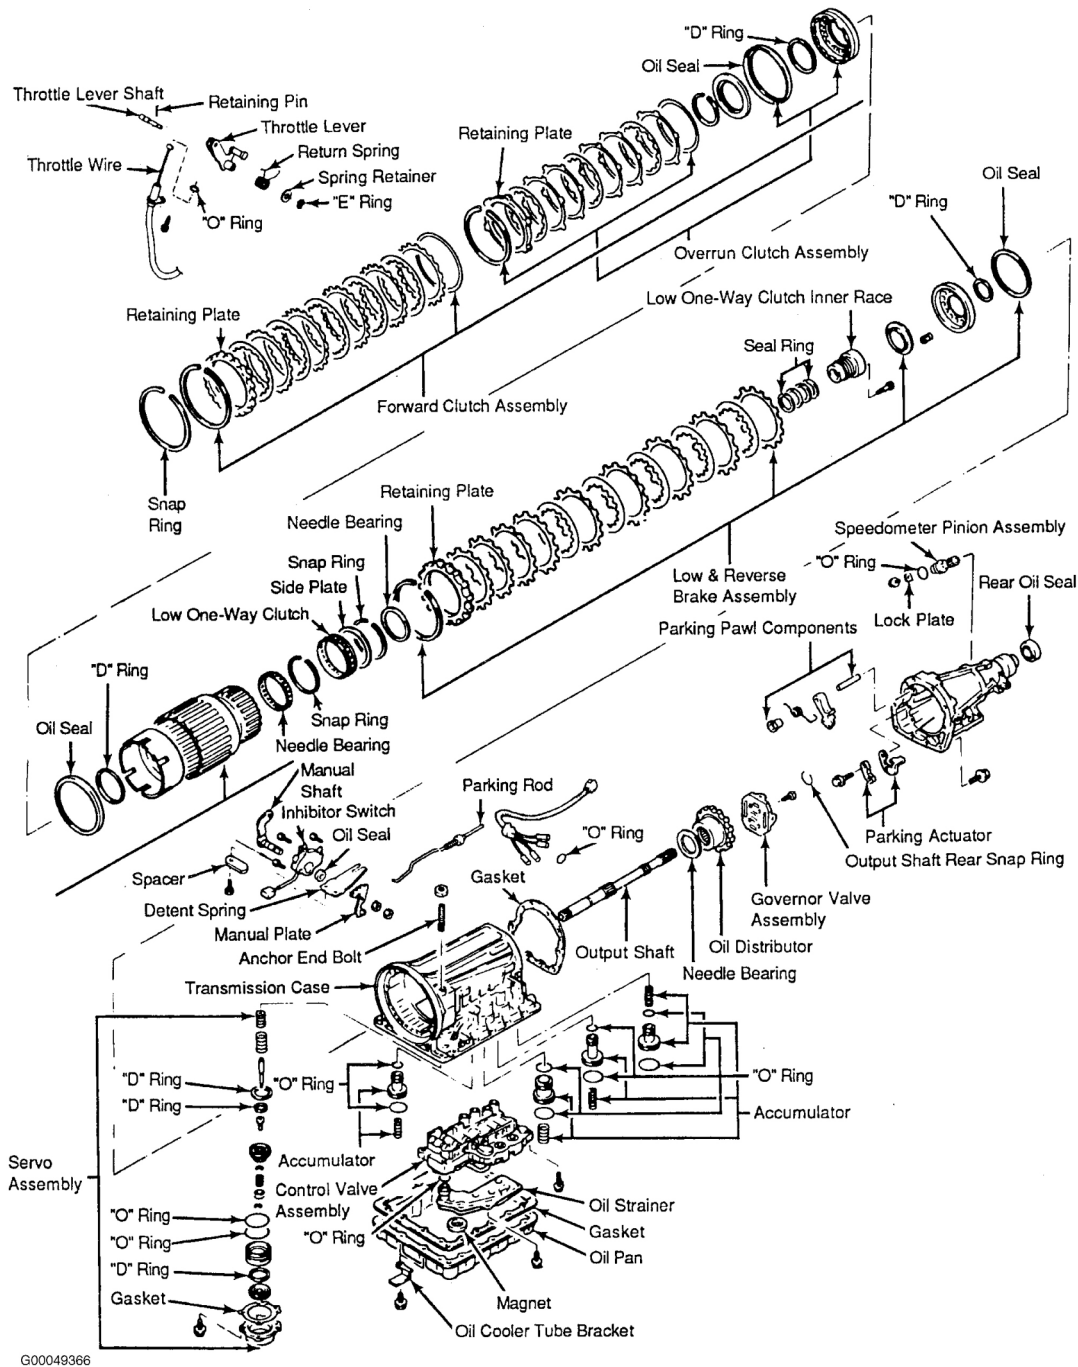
Exploded View Transmission Assembly (RL4R01A) (2 Of 2)
